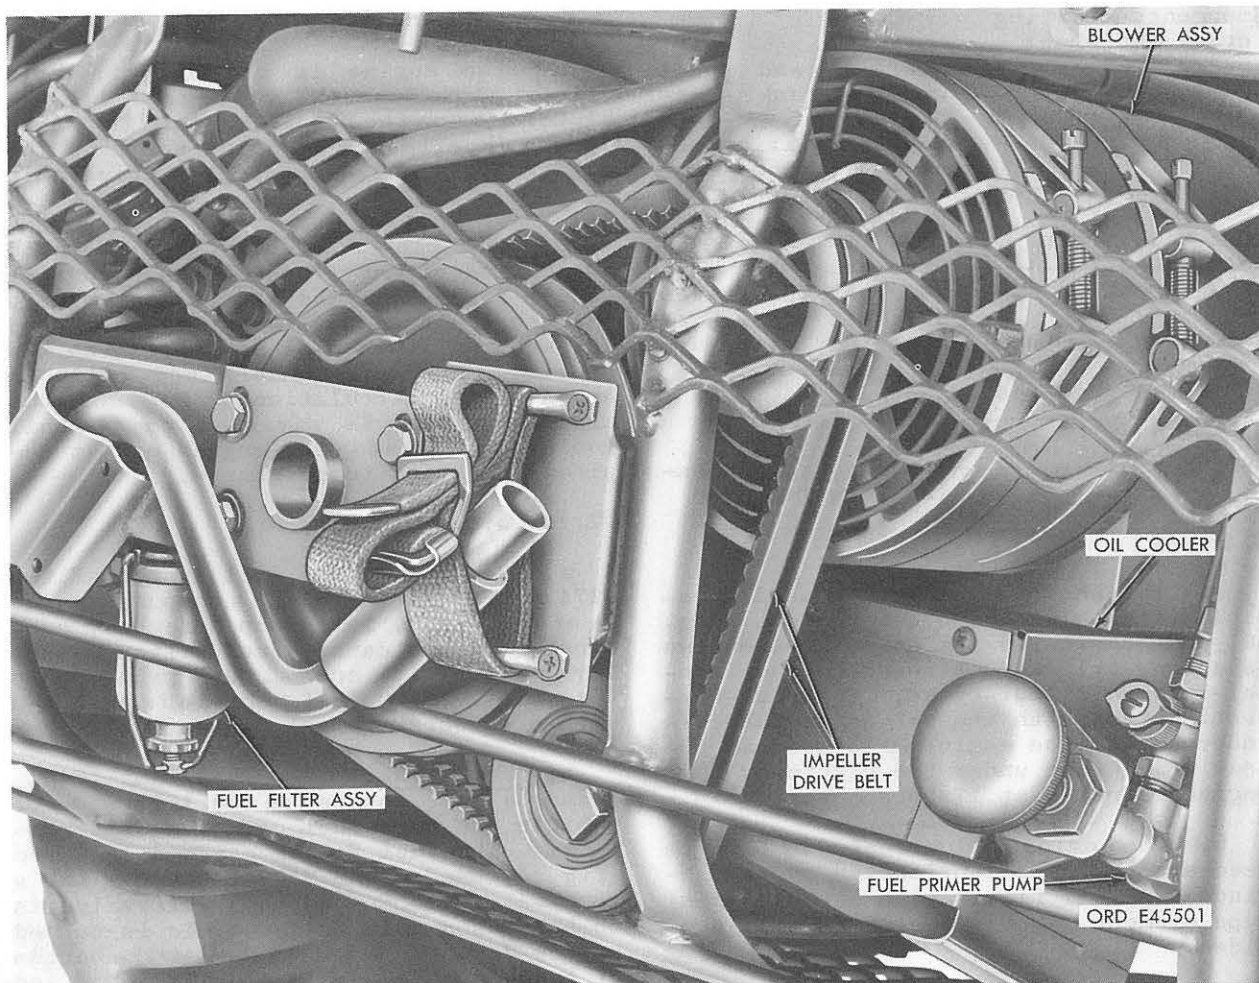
Blower, impeller drive belts, fuel filter assembly, and fuel primer pump locations - M274A1 vehicle.
